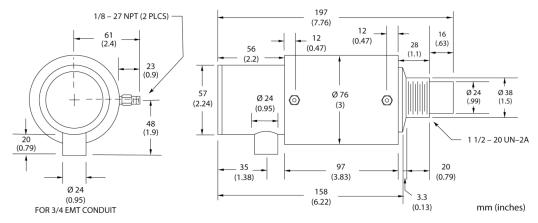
Sensing Head with Air/Water-Cooled Housing Option
